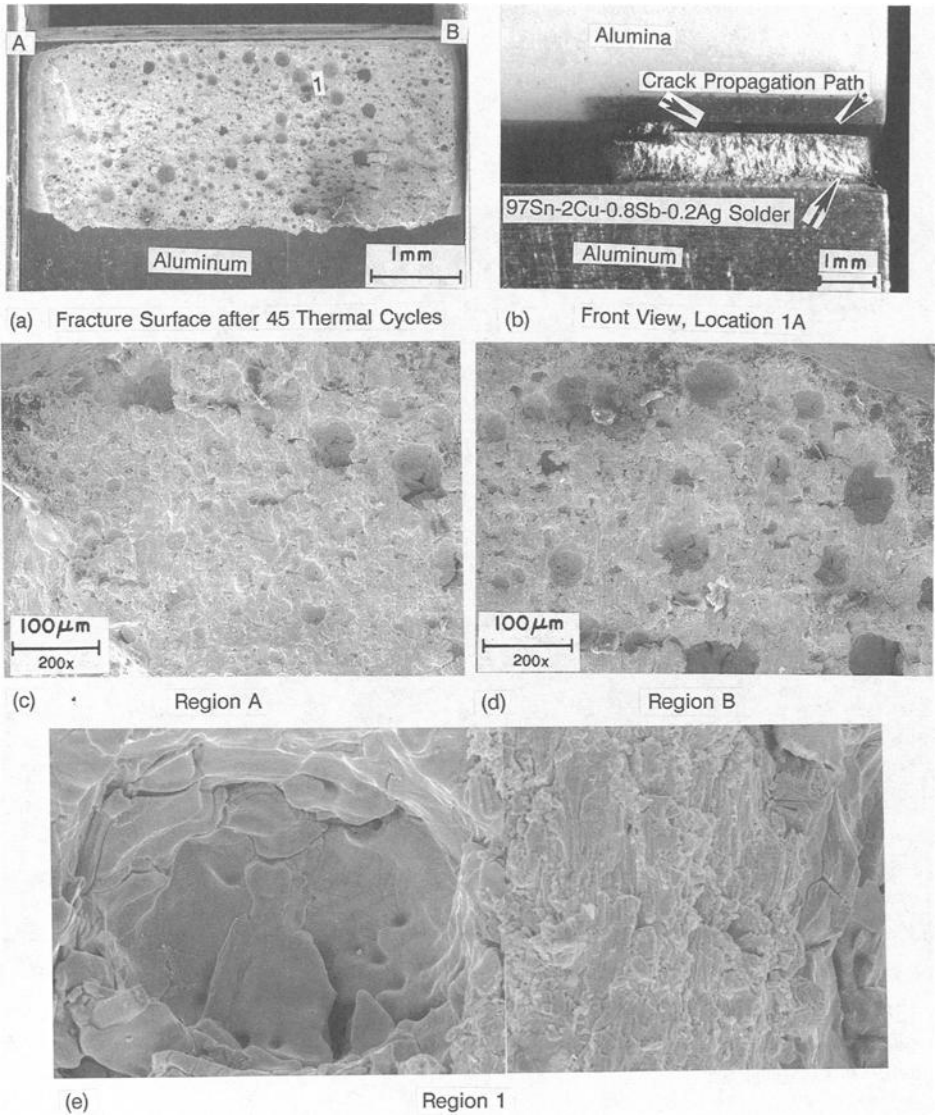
Fracture surfaces and front view of 97Sn-2Cu-0.8Sb-0.2Ag solder joint subjected to thermal cycling between 40 and 140°C with 10-min hold and ramp: (a) fracture surface on aluminum beam, (b) front view showing crack path near the alumina beam, (c) magnification of Region A in (a), (d) magnification of Region B in (a), and (e) magnification of Region 1 in (a).
